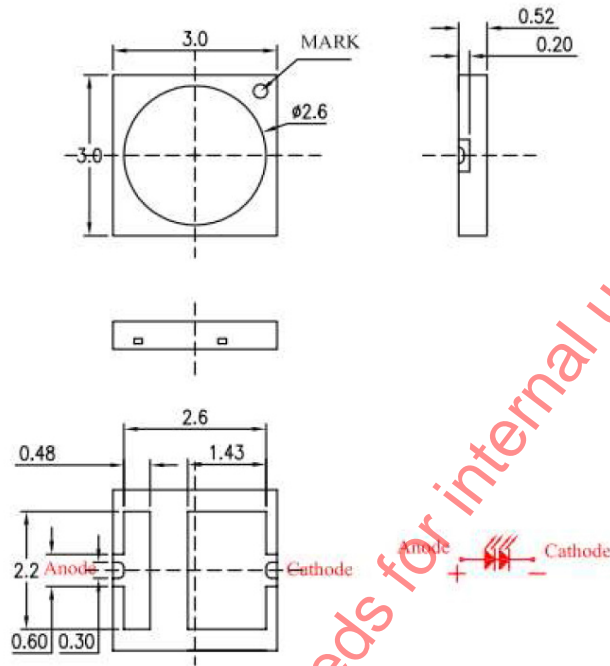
Mechanical Drawing for LUXEON 3030 2D. All dimensions are in millimeters.
